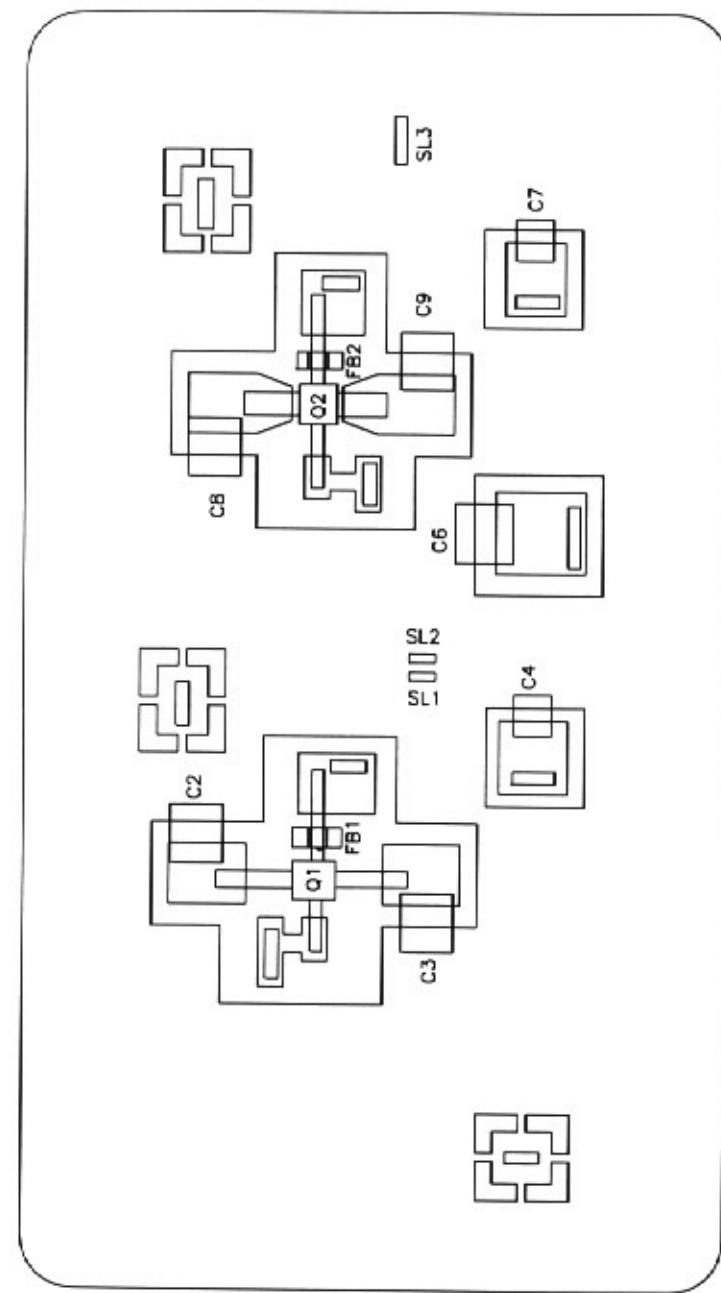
Bottom Side Component Placement of LNA PCB
